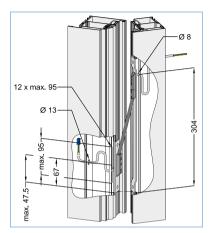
Routing dimensions for T-KÜ-T1 FT + RT and cover plate F24 in aluminum
